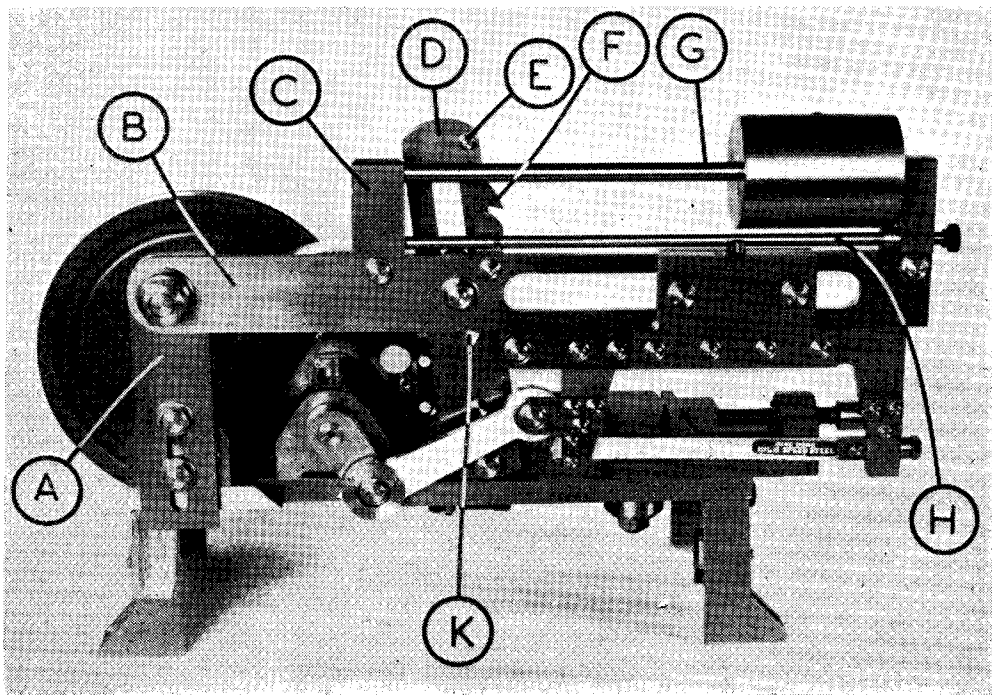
A—Beam pivot arm; B—Beam; C—Weight shaft bracket; D—Beam guide arm; E—Latch pin; F—Beam catch; G—Weight shaft; H—Catch control-rod; K—Stop-bolt.
